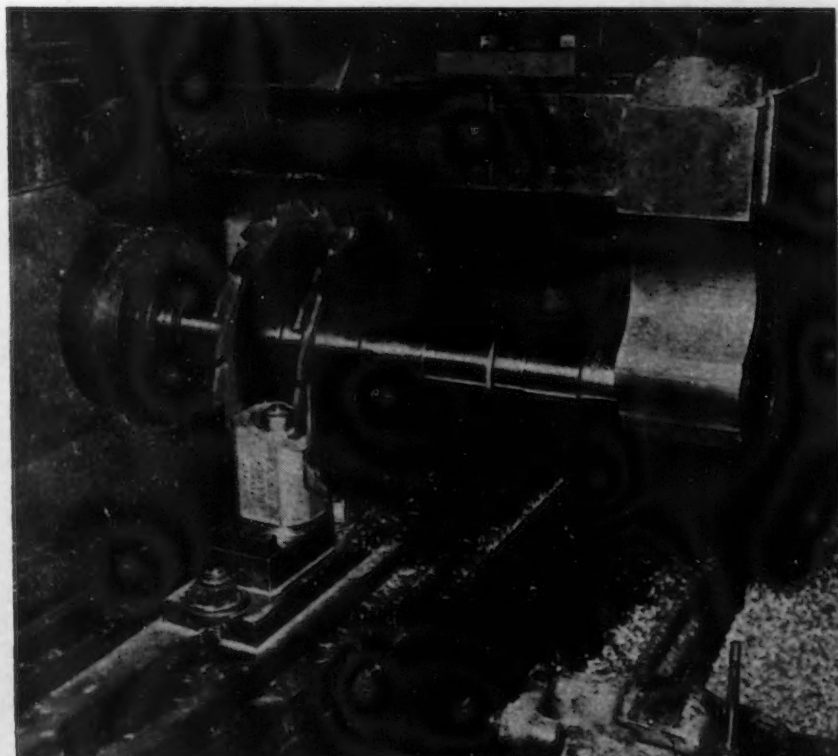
Aluminum alloy sand casting milled in Tests 21 and 22.
